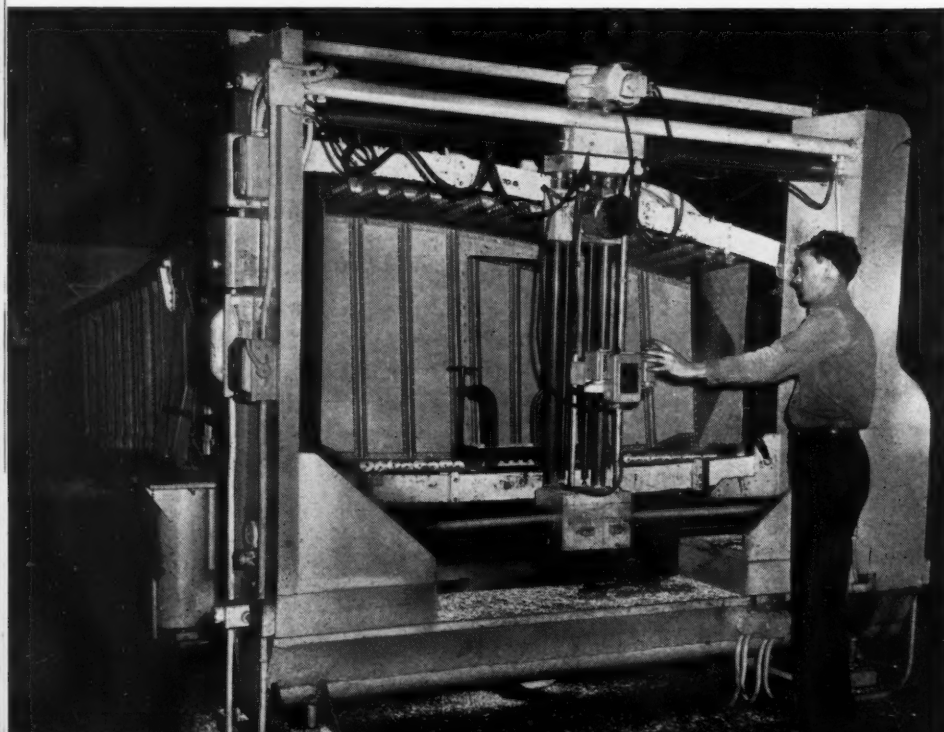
The stringers, "skin," fittings, and ends of spar chords are machined on a special machine after being assembled into wing-panel sections
